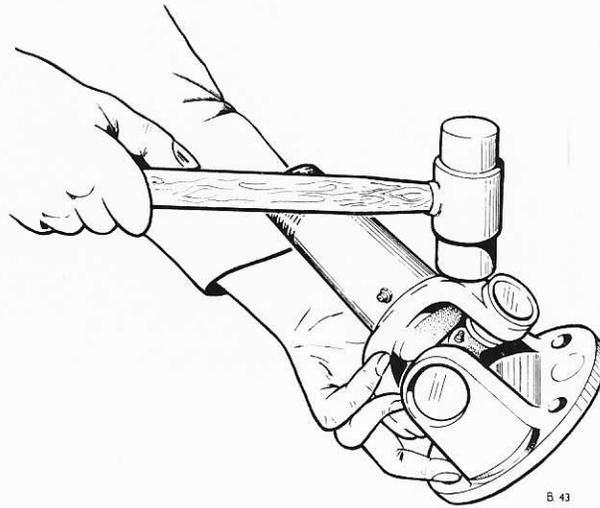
Method of removing the races from the yoke eyes of the Hardy Spicer universal joint
